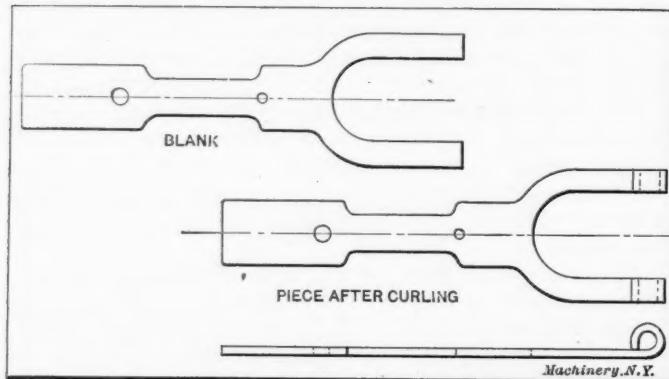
Piece to be bent and Finished Product, shown Full Size
